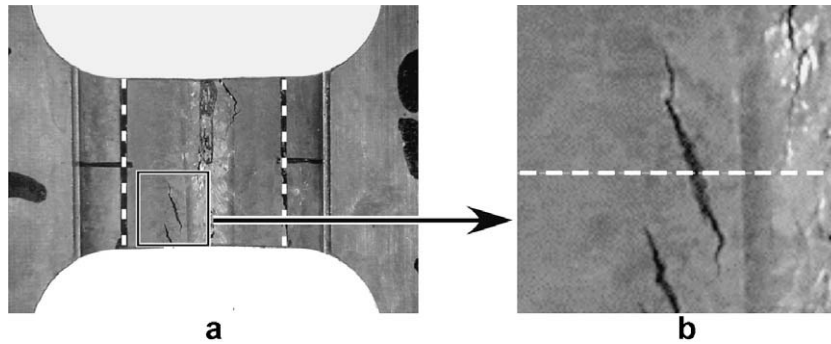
(a) Tensile bar containing weld after testing. (b) Higher magnification of crack showing cross-section plane.
